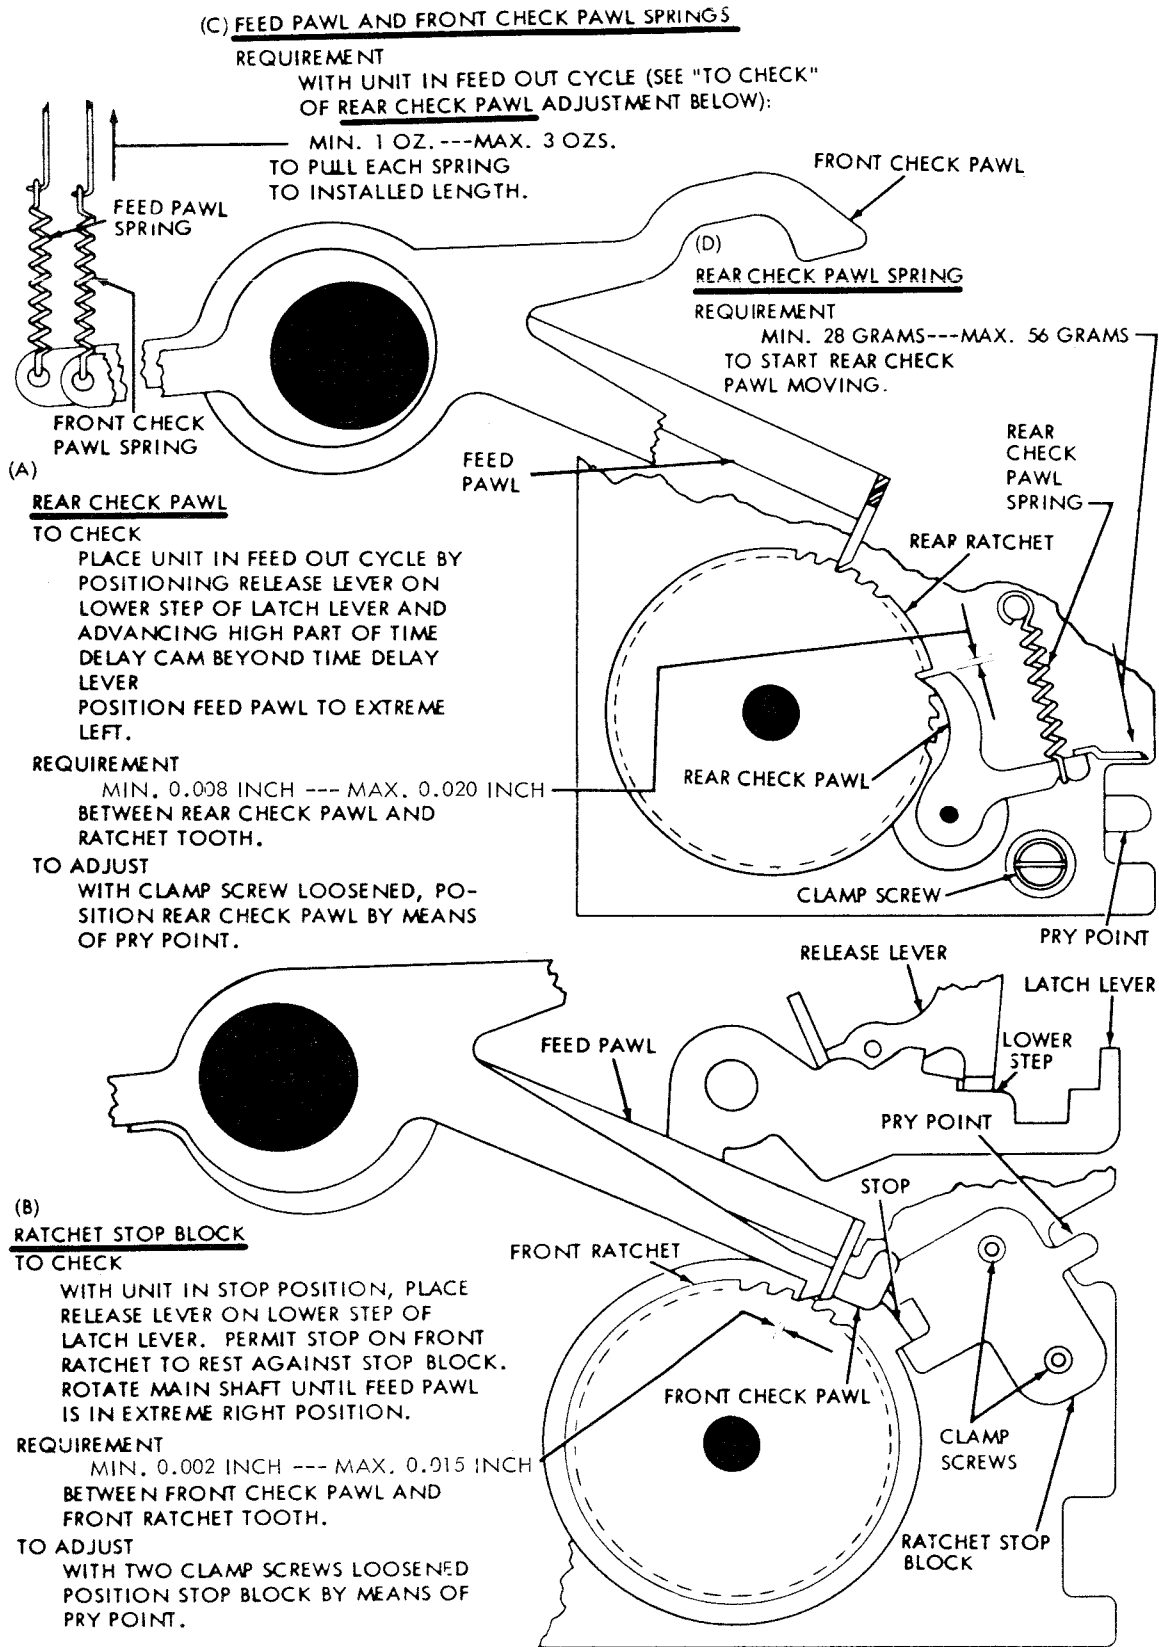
D. TYPING REPERFORATOR TT-375/UG, REMOTE CONTROL NON-INTERFERING BLANK TAPE FEED-OUT MECHANISM
